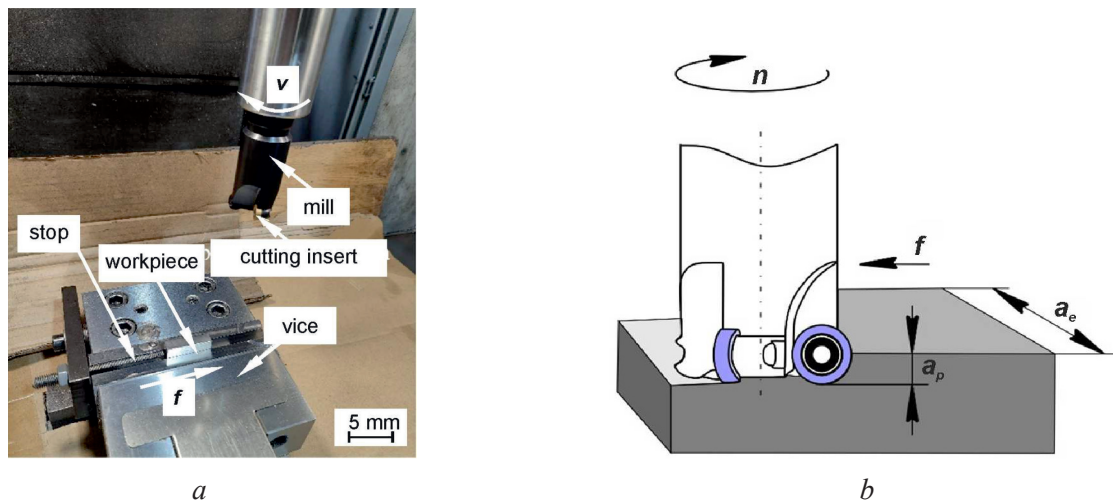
Appearance of the milling zone (a) and milling scheme (b) showing the cutting elements
